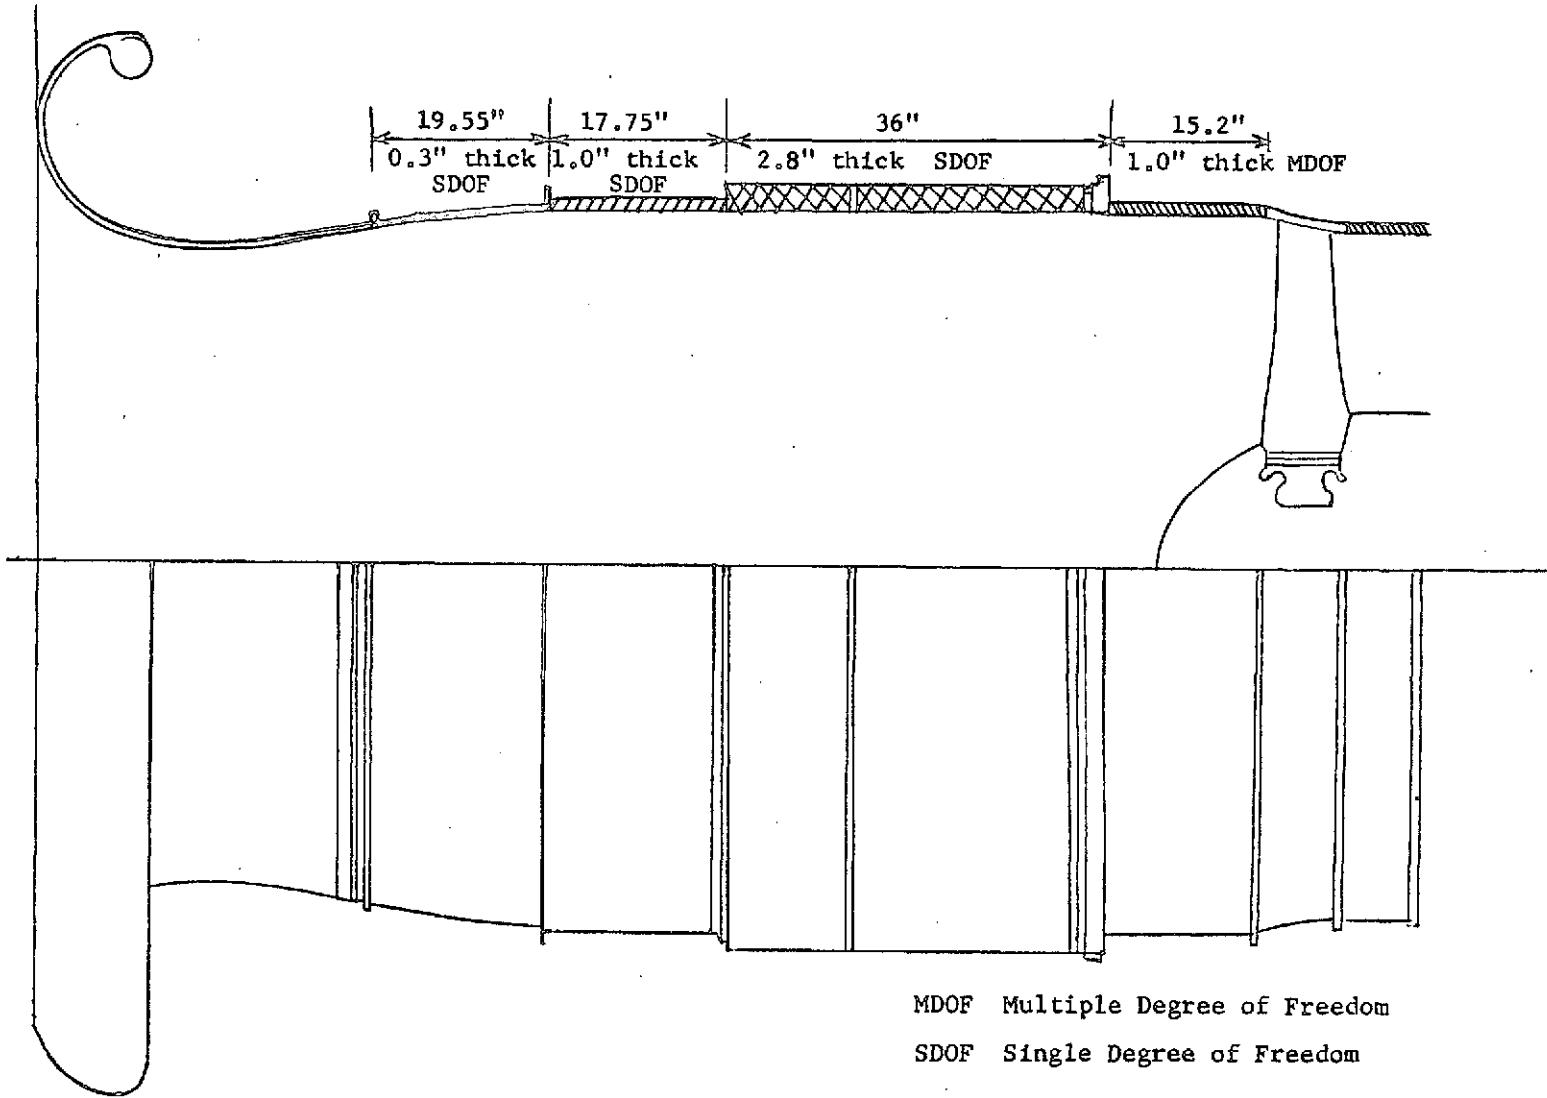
Cross Section Showing the Inlet Wall Treatment.
